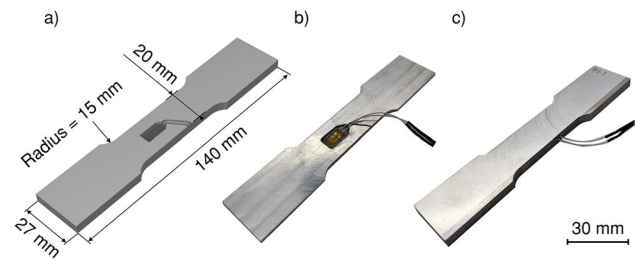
(a) Schematic representation of the sectioned tensile sample with geometry specifications, (b) milled cross-sectional view illustrating the SG integration position, and (c) milled PBF-LB/M manufactured tensile sample with integrated SG
